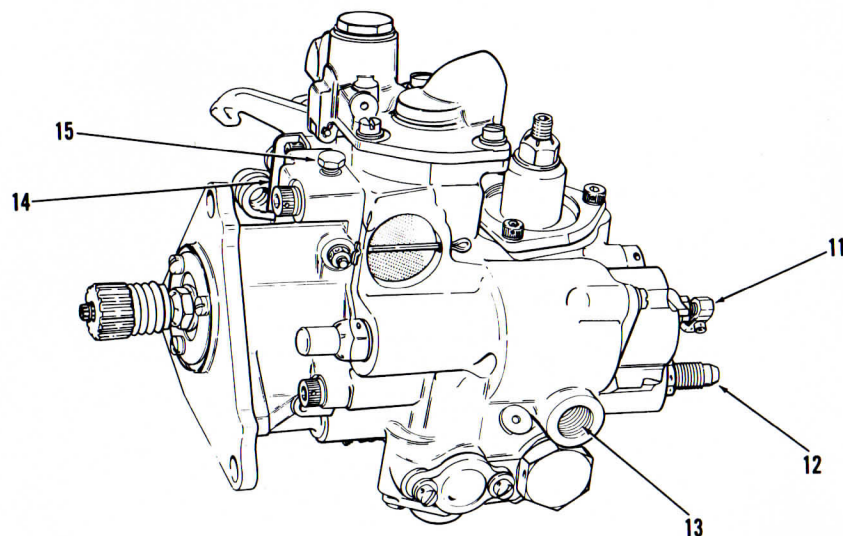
Model DP-T3 Turbine Engine Main Fuel Control - External View (View 1)
